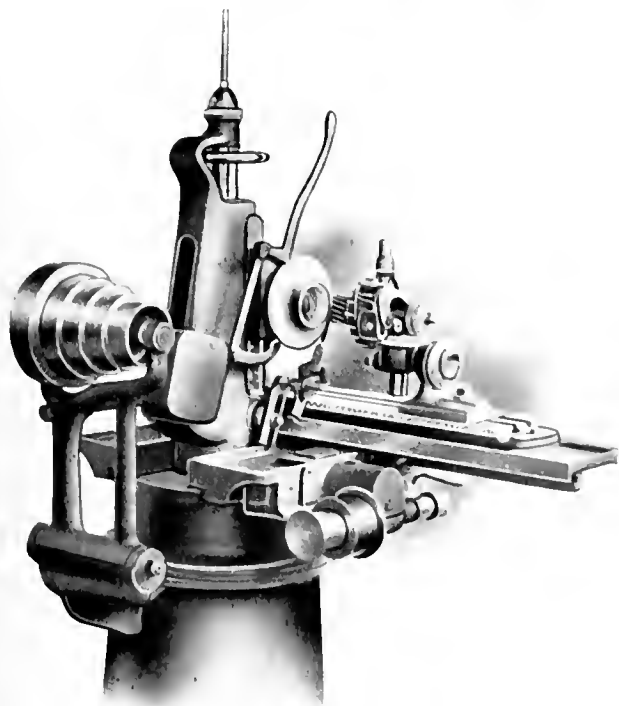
Illustrating the Advantage of the Two-faced Grinding Wheel
